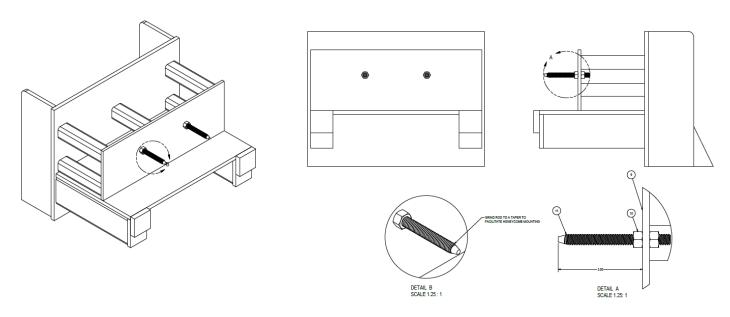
EXAMPLE METHOD USED TO INSTALL HONEYCOMB
